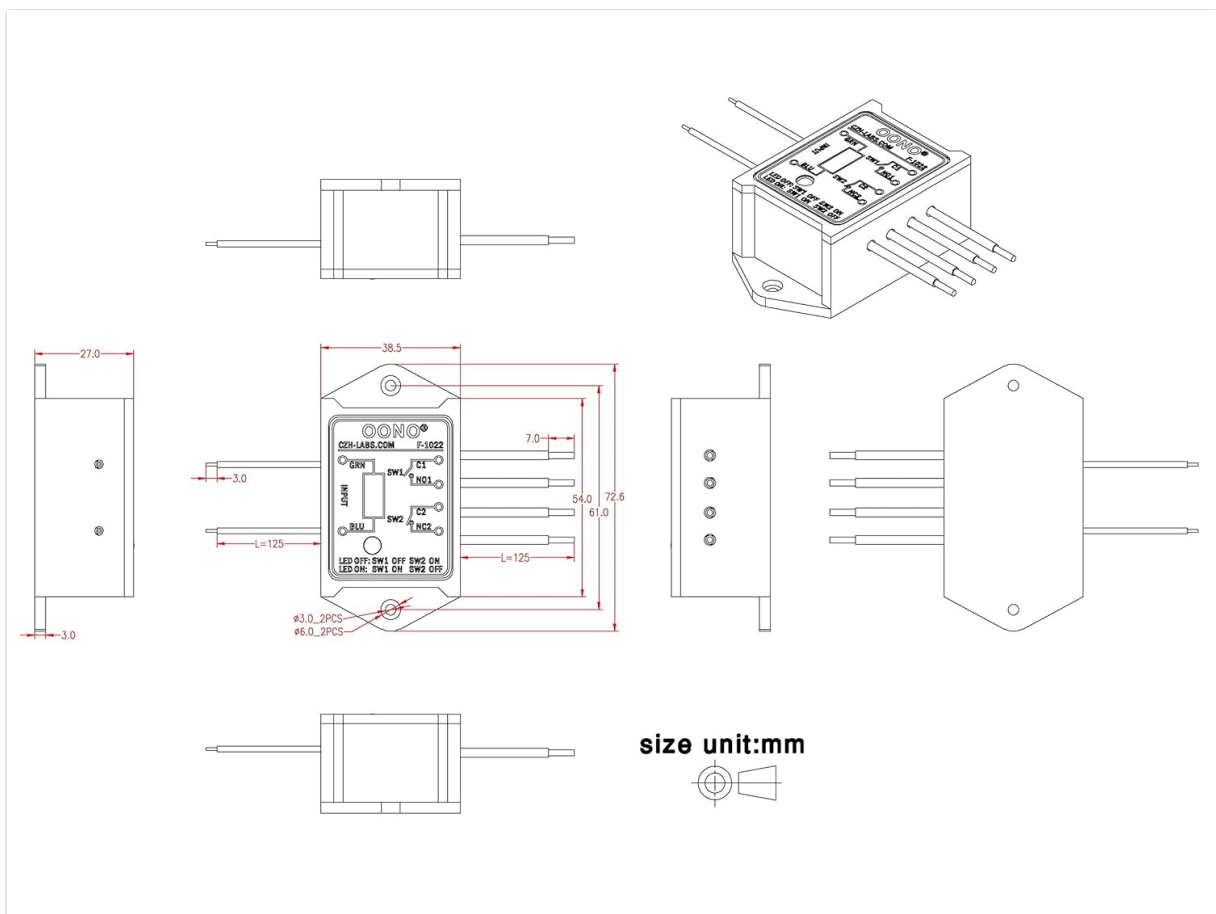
Technical drawing providing precise dimensions of the relay module in millimeters, useful for mounting and integration into enclosures.
